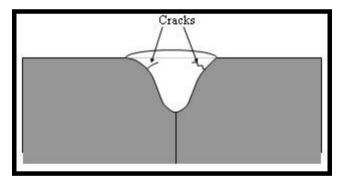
Schematic sketch of SAW bead profile showing solidification crack
